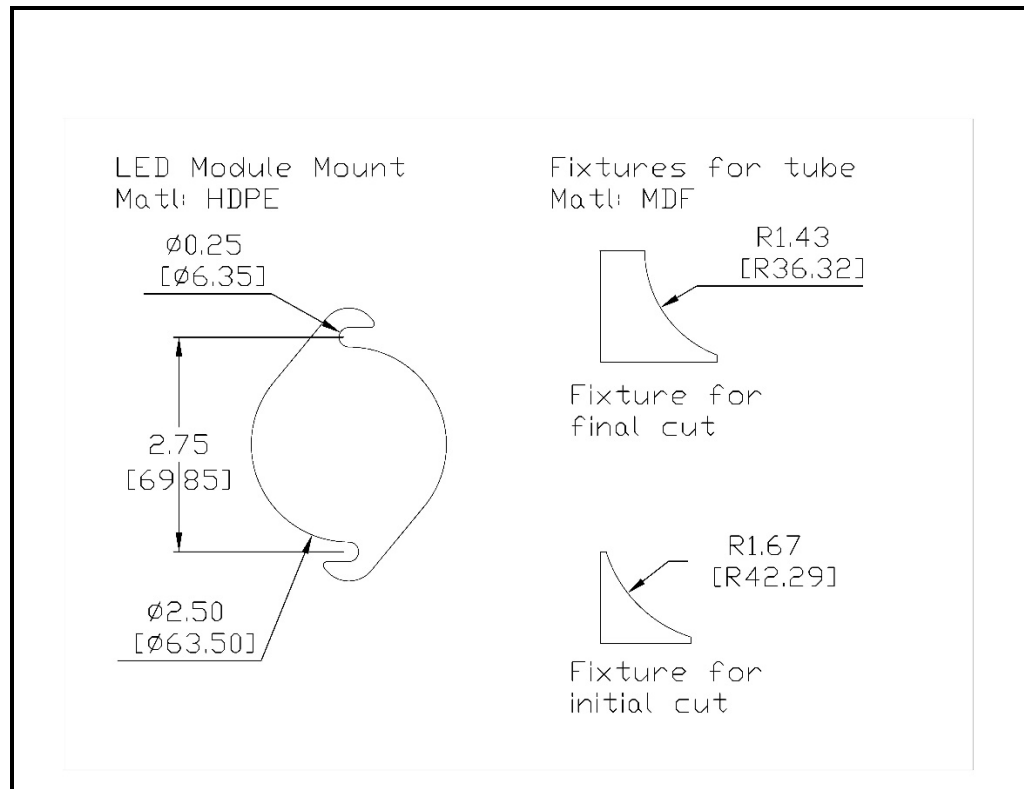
LED light module mount; Fixtures for indexing of tube section cuts. Dimensions: Inches [mm]
